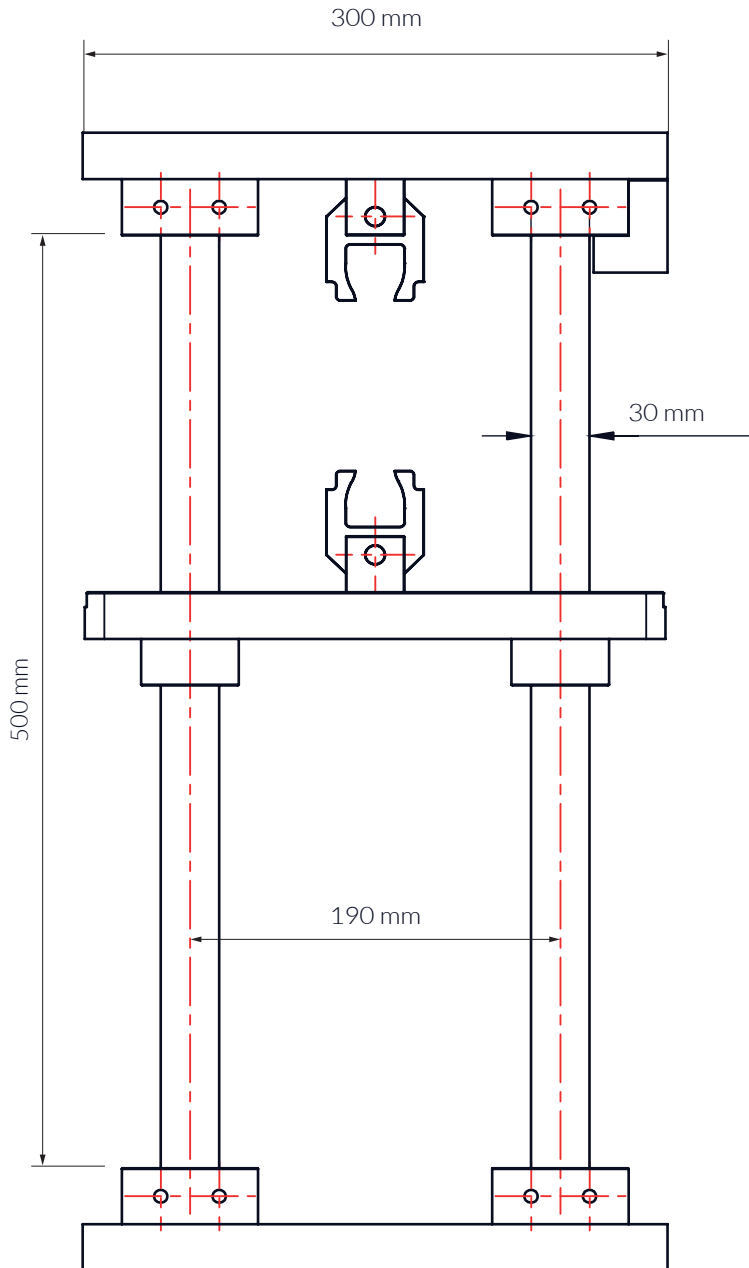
Testing machine: technical draw: technical draw with the measurements of the steel parts.
